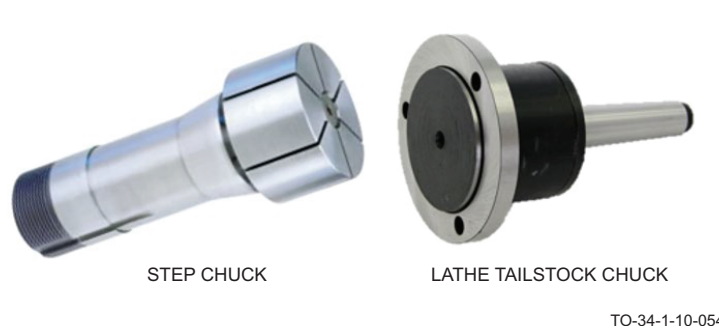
Step Chuck Machine Collet and Lathe Tailstock Chuck
